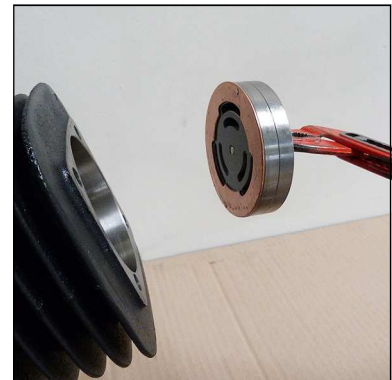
Place new inlet and outlet valve straightly into cylinder
